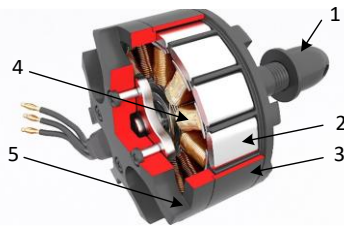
Structure of the outrunner type drone BLDC thrust motor; where 1 is the rotating propeller shaft, 2 is the rotating magnets, 3 is the rotor with magnets, 4 is the stationary motor coils, 5 is the stationary motor housing for bearing and coil fixation. Applied from [23].
